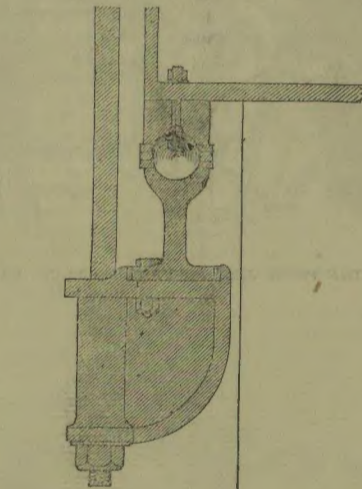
GUN-METAL BALLS FOR EXPANSION OF THE TUBE.
